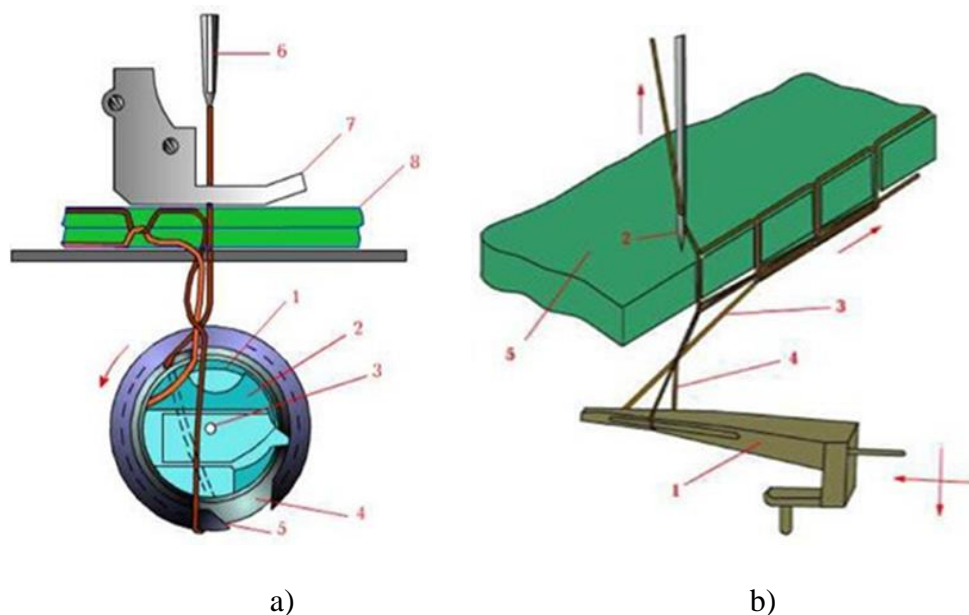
The process of forming a a) two-thread lock and a b) two-thread seam
